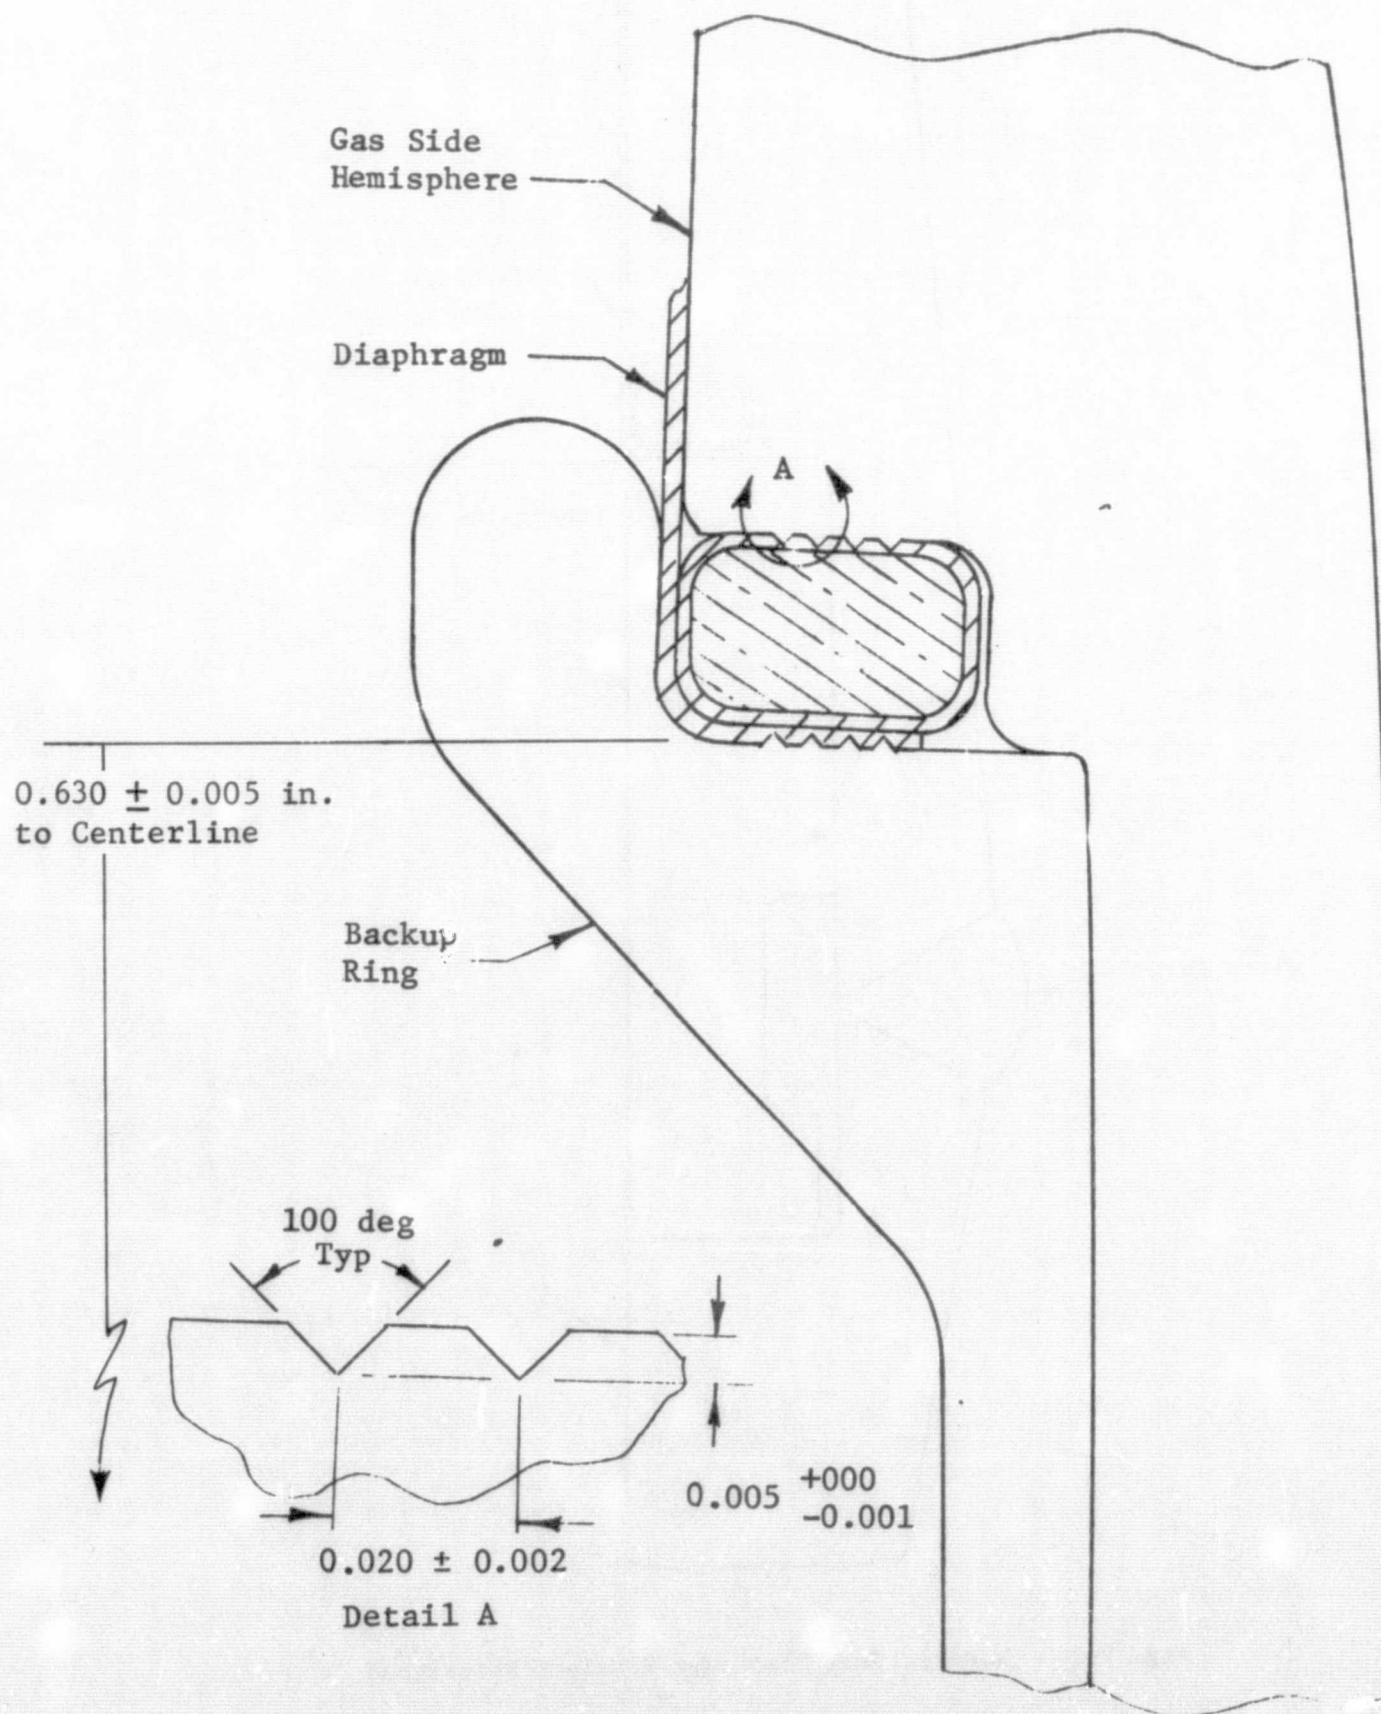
Oxidizer Tank, Original Seal Joint Design
